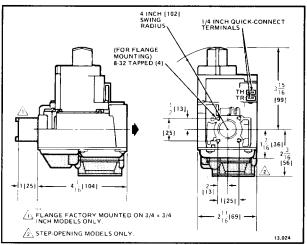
VR8300 DIMENSIONS IN INCHES AND [MILLI-METERS].
